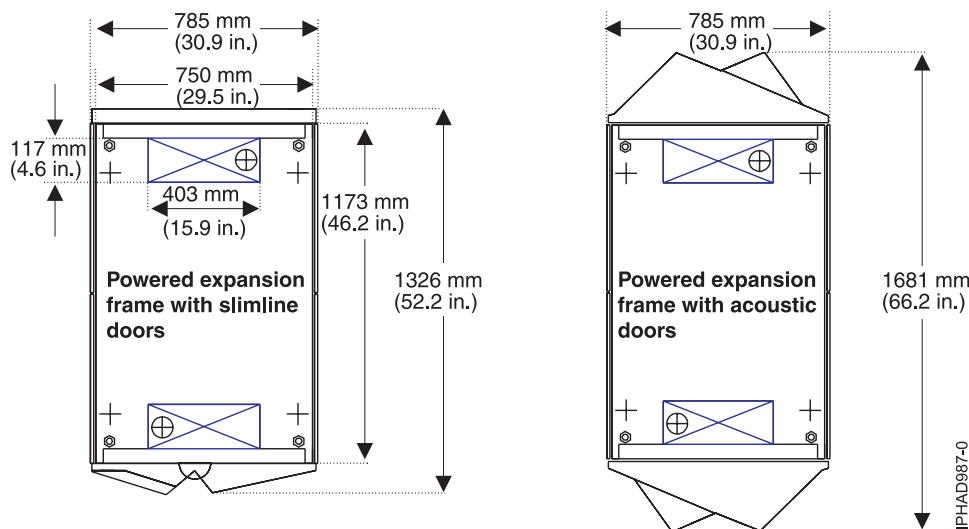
Plan view for single-frame systems with slimline doors and acoustical doors
